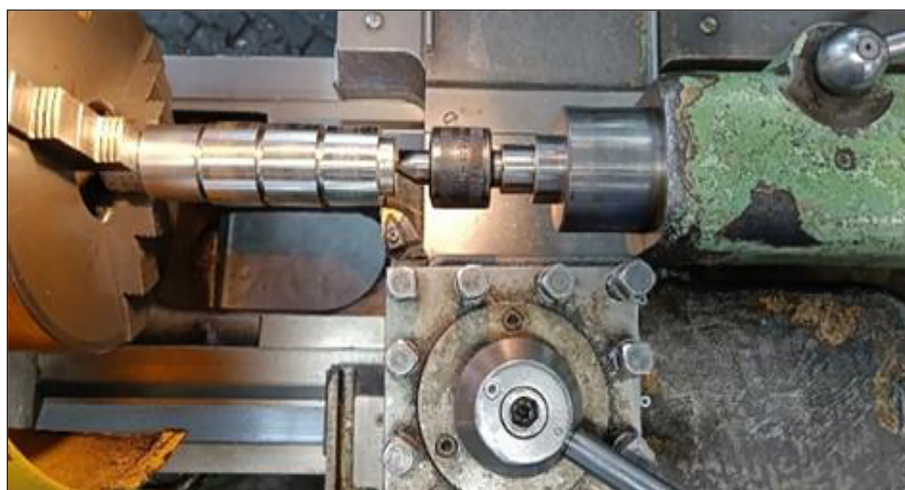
View of mounting the shaft and cutting tool on a TUC 50x1000 lathe
